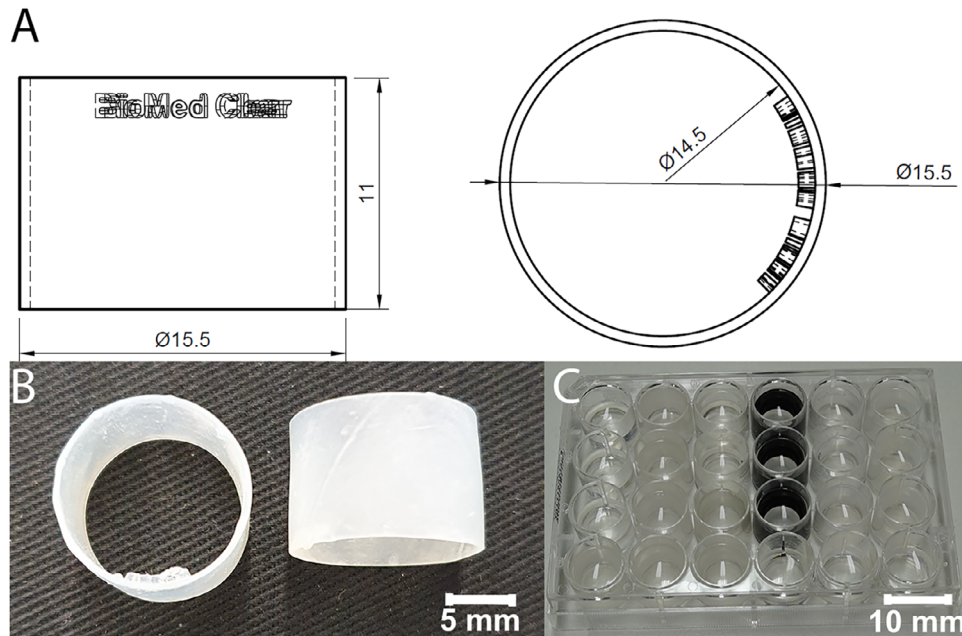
| (A) Technical drawing of the 3D-modeled rings designed to fit into a 24-well microtiter plate (dimensions in mm), (B) printed ring (Clear V4) scale bar 5 mm (derived from the known outer diameter of the ring, 15.5 mm), (C) 3D printed rings in 24-well microtiter plate, scale bar: 10 mm (derived from the standard well diameter of a 24-well plate).
